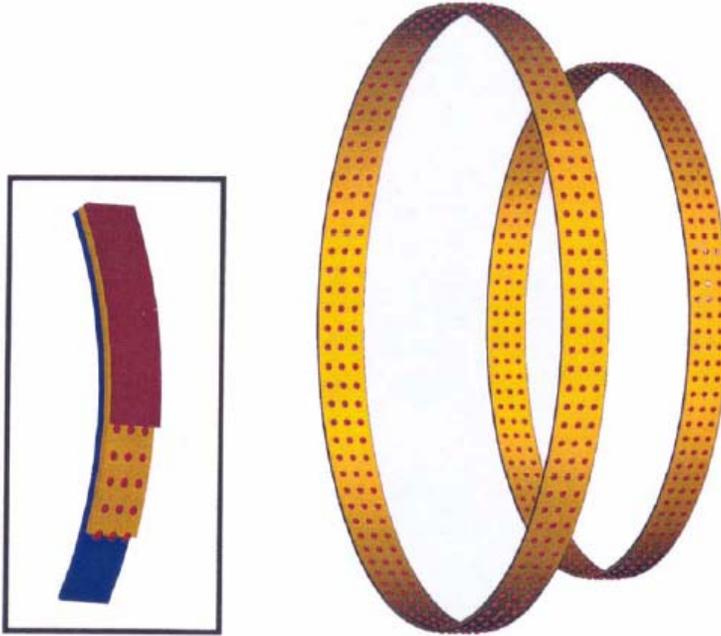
Possible configuration of exoskeletal engine radial ball bearings
